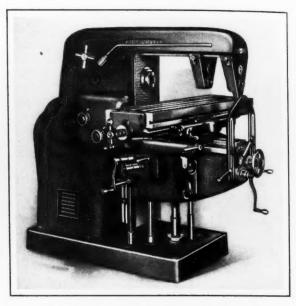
Cincinnati New No. 3 Universal Milling Machine
